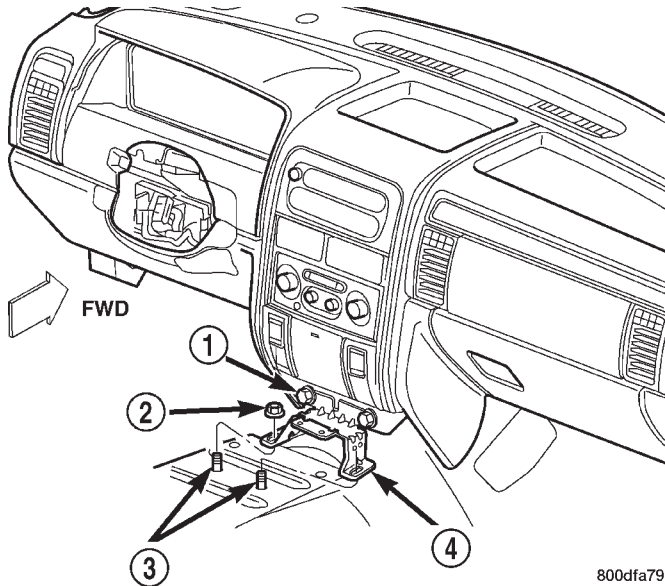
Instrument Panel Center Floor Tunnel Bracket Remove/Install
